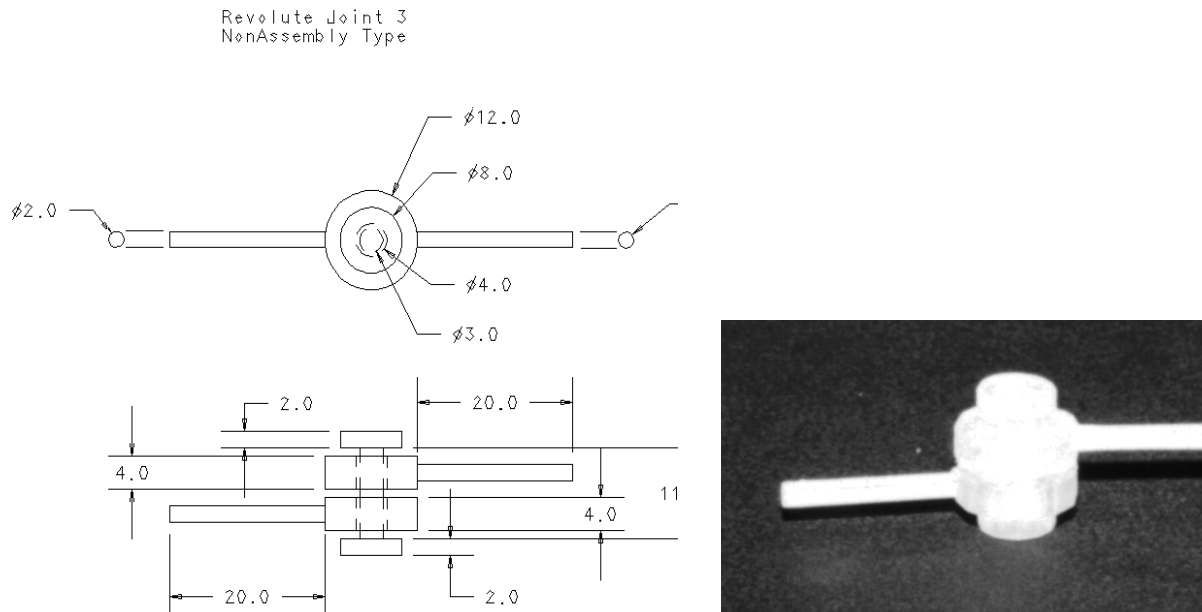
Non-assembly Type Revolute Joint (all dimensions are in mm)
